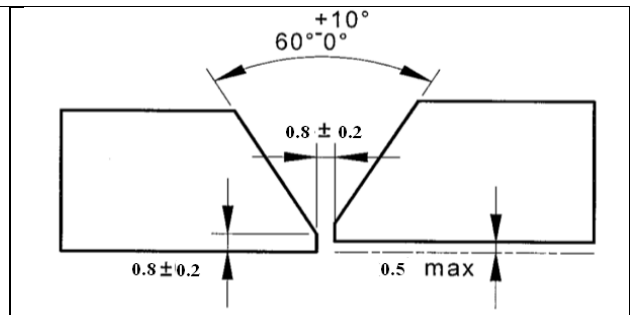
Geometric dimensions and tolerances for a single-V butt weld prep for the MWIC test specimen.
